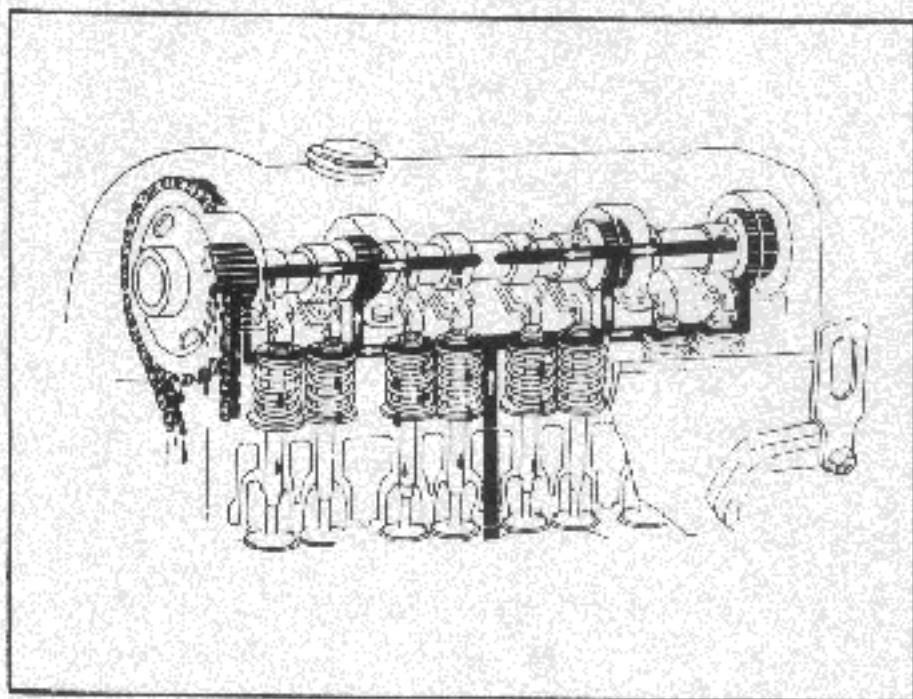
Cylinder head lubrication for L13 and L16 engine
